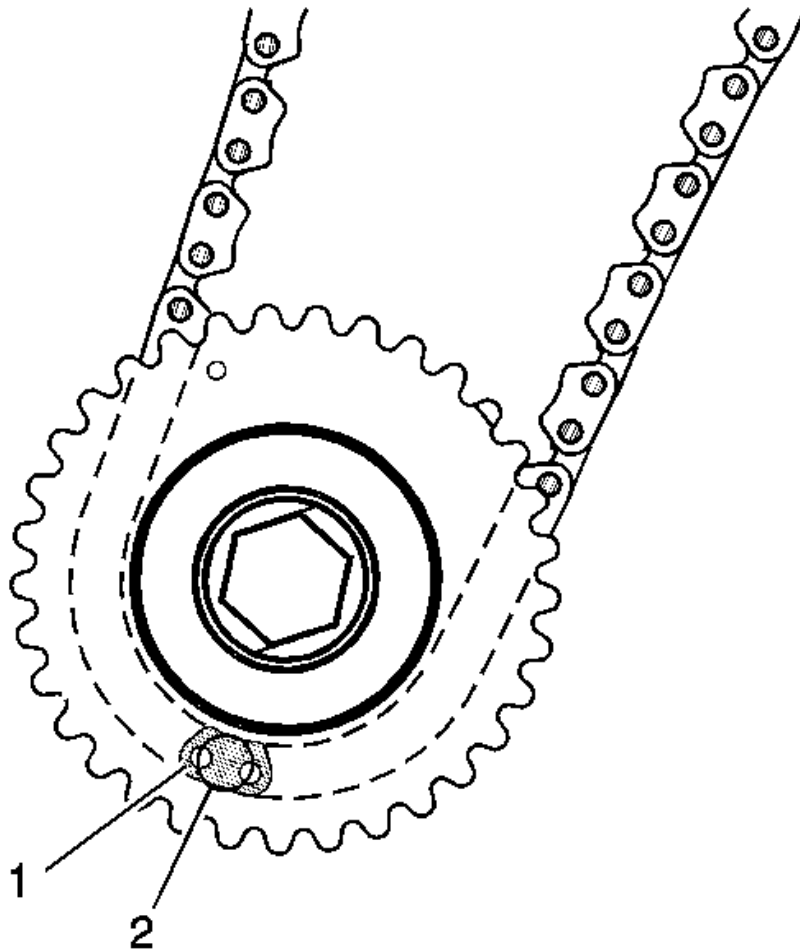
View Of Crankshaft Sprocket Timing Mark & Oil Pump Cover
